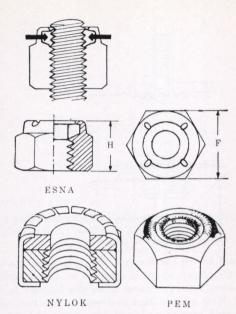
INTERFERENCE NUTS: In this type lock nut, a collar of fiber, plastic or similar material is incorporated into the nut. Collar is smaller than screw so it must be distorted when nut is threaded onto screw. Friction between collar and screw threads provides good locking action shown at top left.
